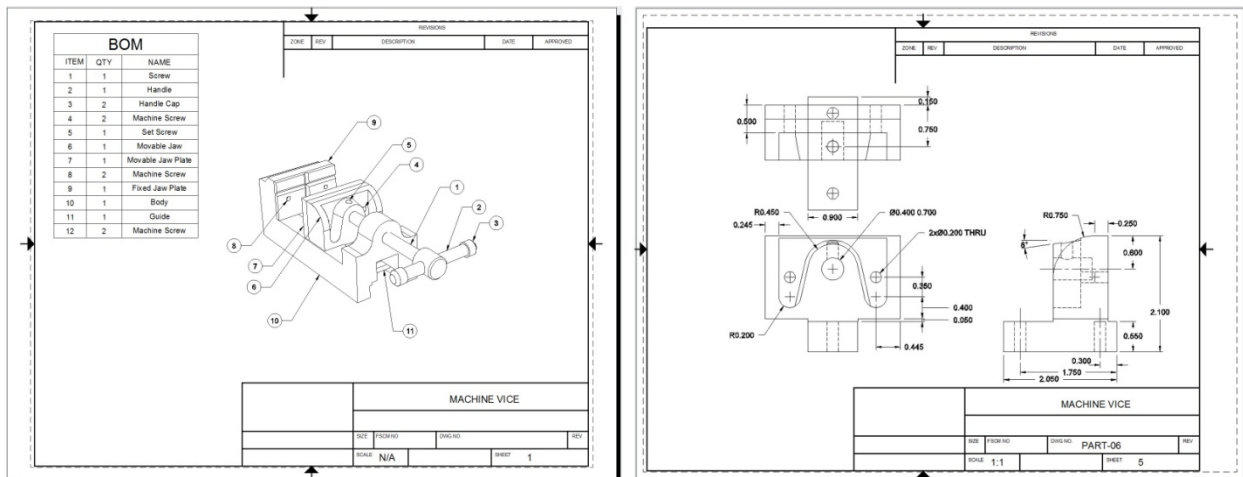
Completed task #7 drawing – a 3D machine vice assembly with separate sheets for each part.
